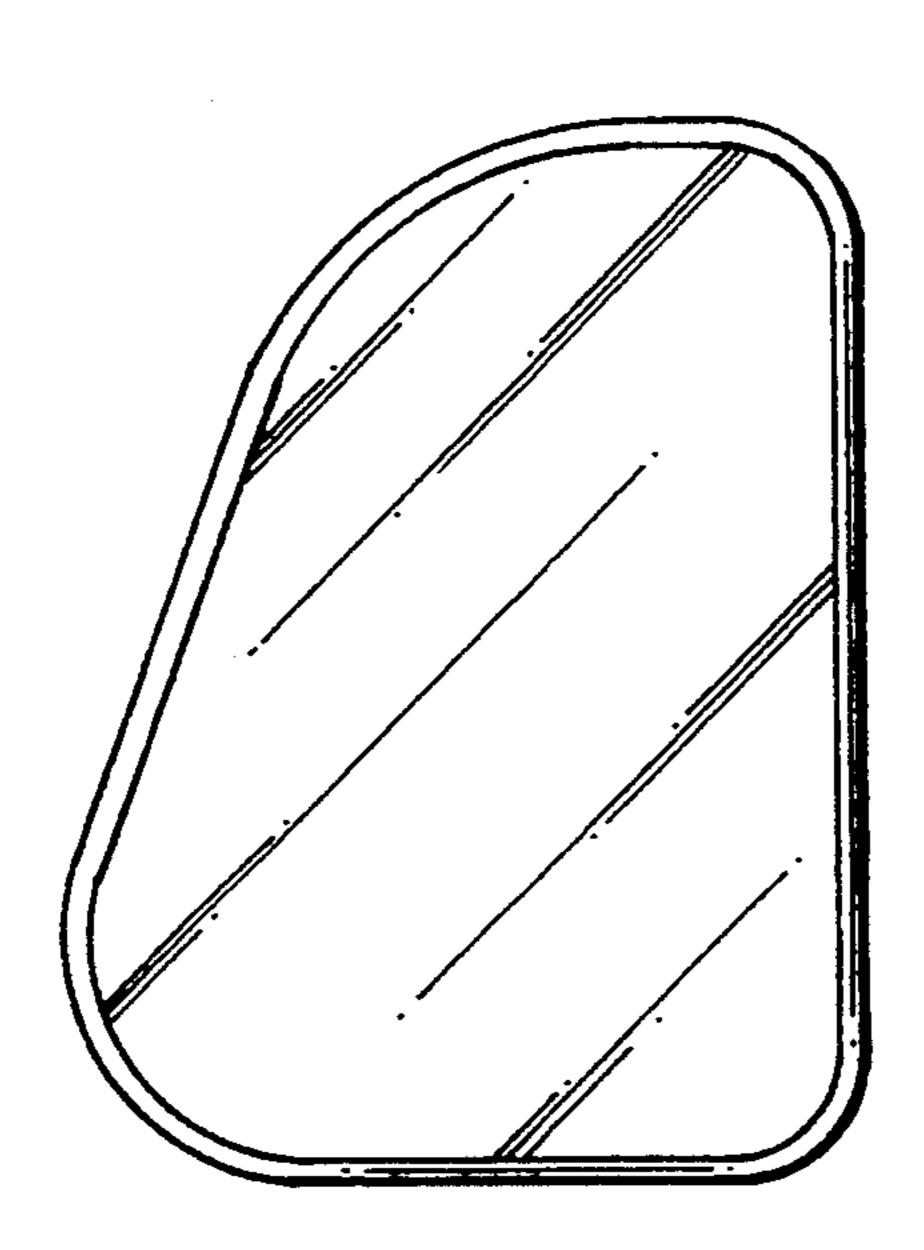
is a rear view of the second embodiment of a rear view mirror;
